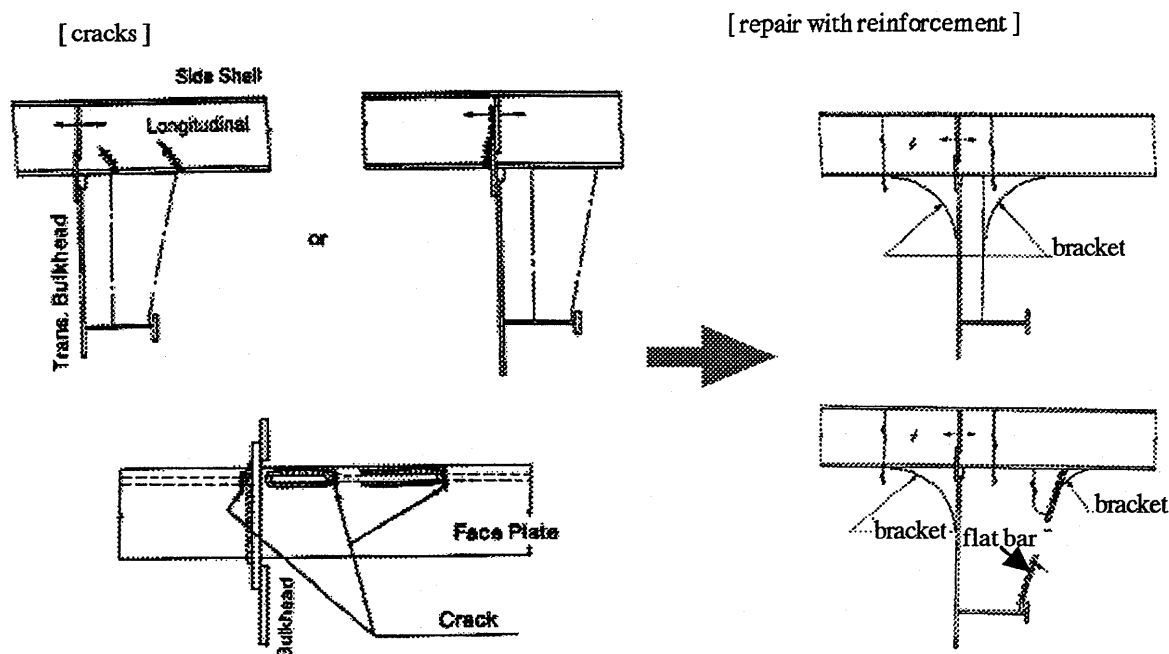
Examples of fatigue cracks and their counter measures
